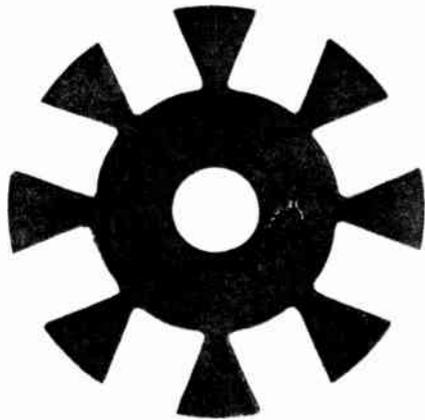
A TYPICAL DESIGN OF SLOTTED DRUM ARMATURE.
